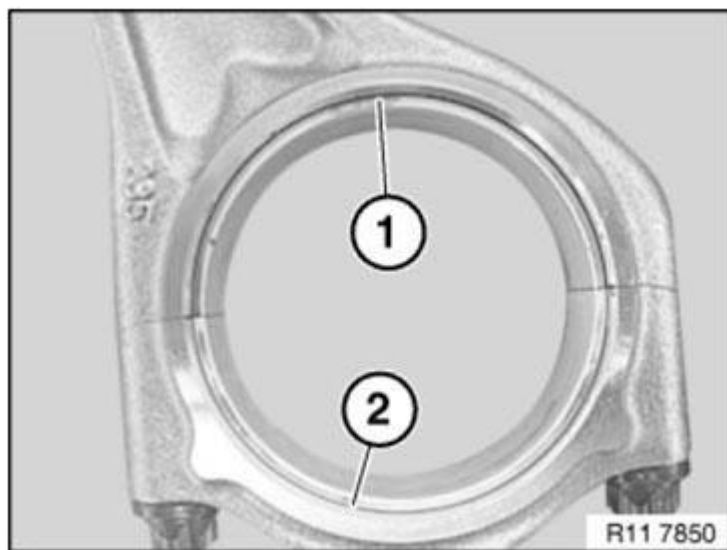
Identifying Blue Bearing Shell And Red Bearing Shell
